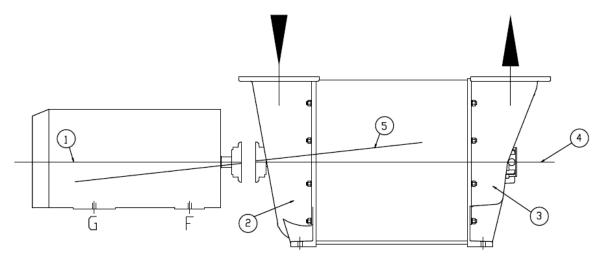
Calculation of the adjustment with the motor on the inlet end
